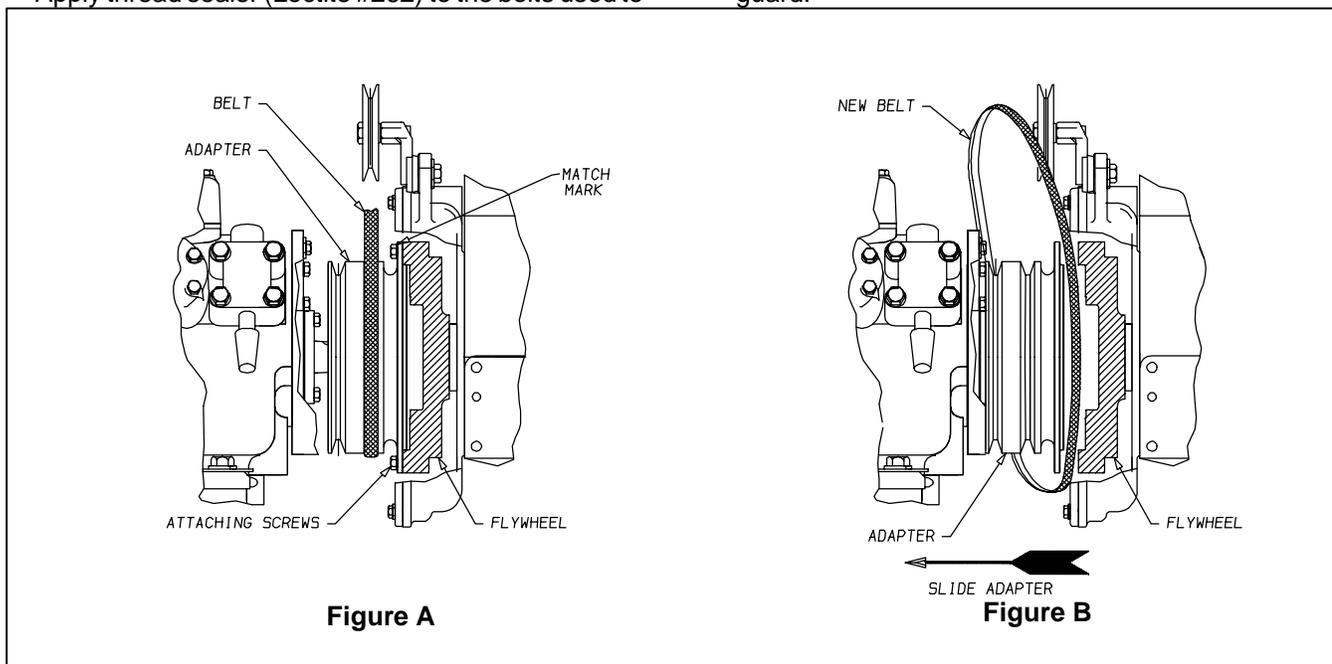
Removing V-Belt from Engine Adapter Drive Sheave
